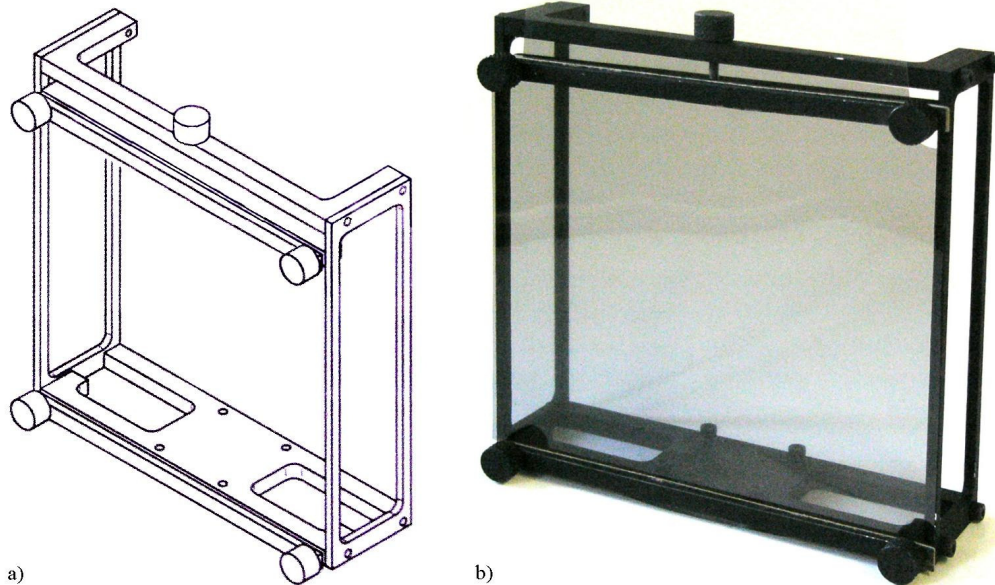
Cutoff grid support a) Drawing, b) Photograph
